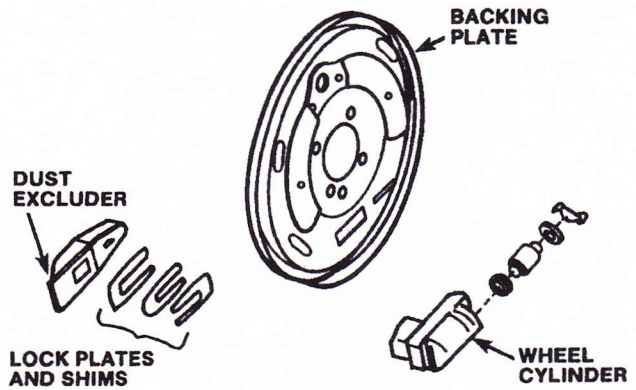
Lock plates and shims can be used to hold the wheel cylinder to the backing plate.
